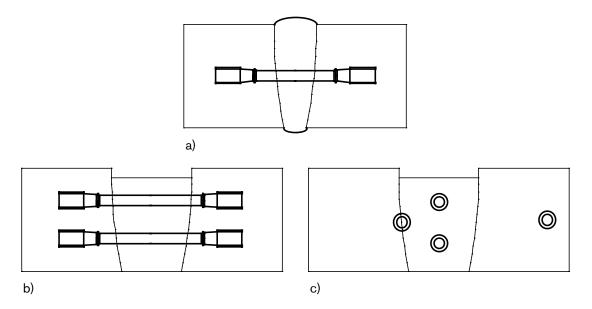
Specimen extraction positions. *a*) Cross-weld positions *EB*, *b*) Cross-weld positions *FSW*, *c*) Longitudinal positions *FSW*.
